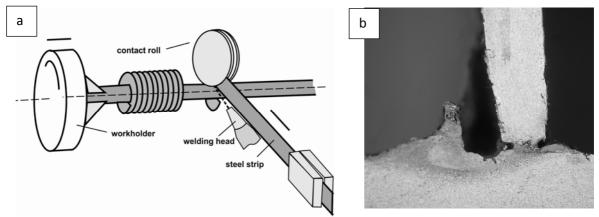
Welding finned tubes in the ribs: a) a diagram of the process pipe welding in the ribs, b) butt joint pipe - rib, ribs visible separation, magnification 5x
